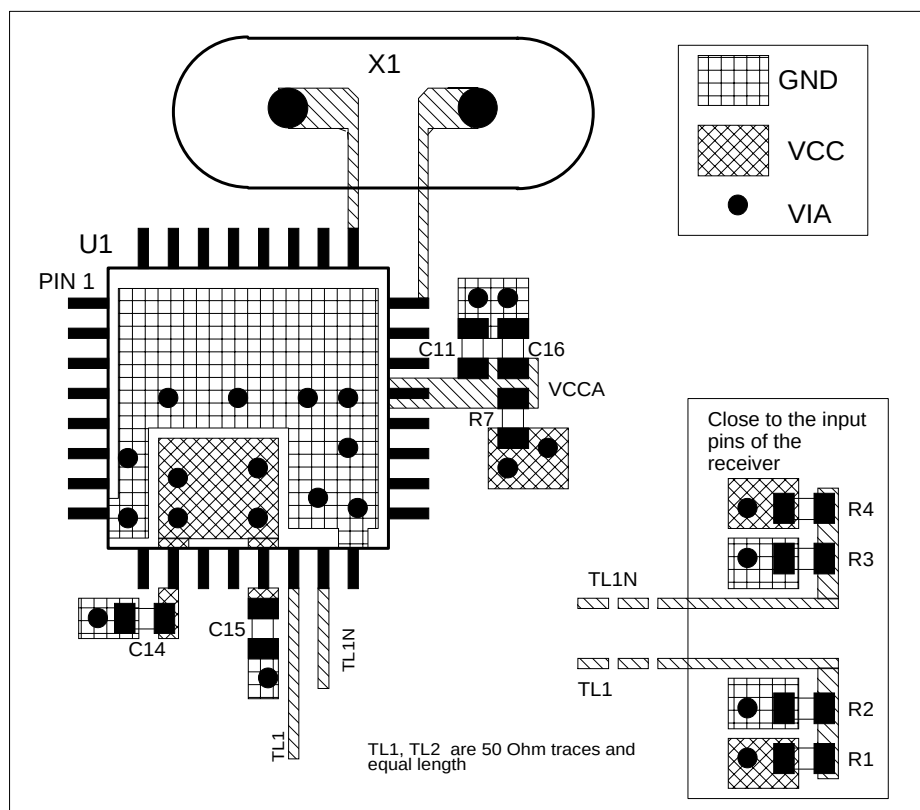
B. PCB BOARD LAYOUT FOR ICS8432-51
